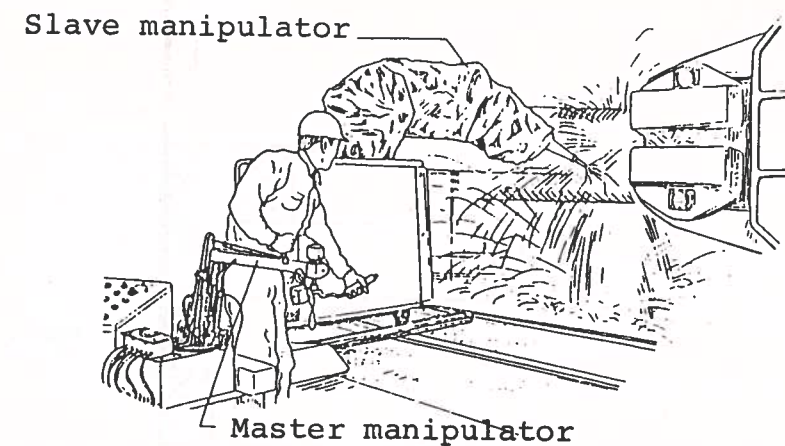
Scarfing robot removing defects from high-temperature forging.
